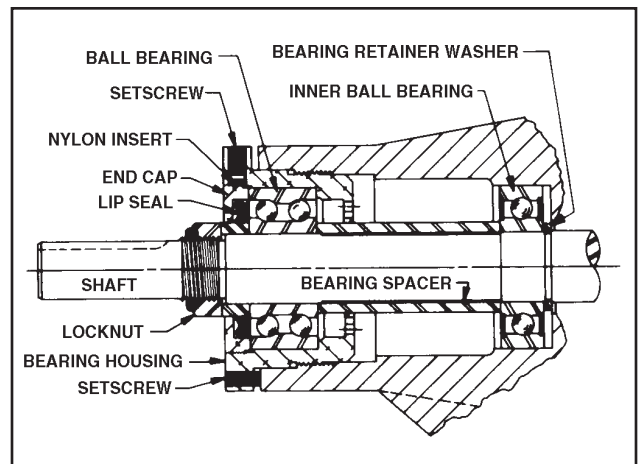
Thrust-Bearing assembly (AS, AK, AL)
